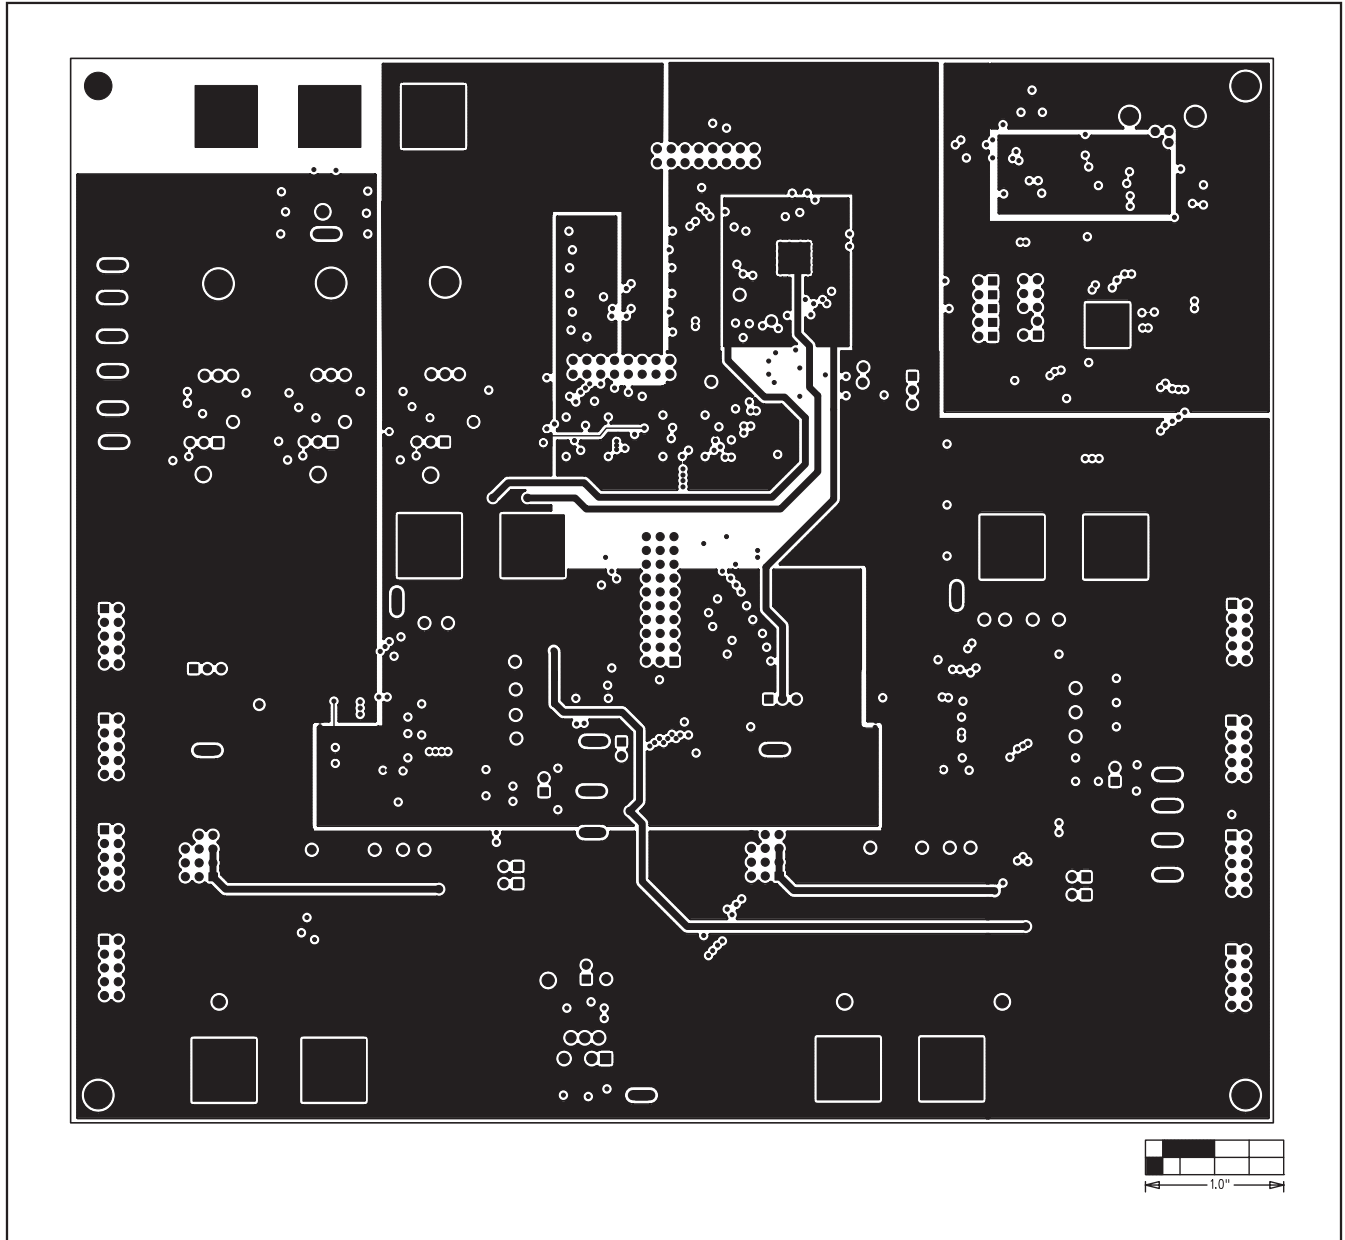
MAX9959 EV Kit PCB Layout—3rd Layer
